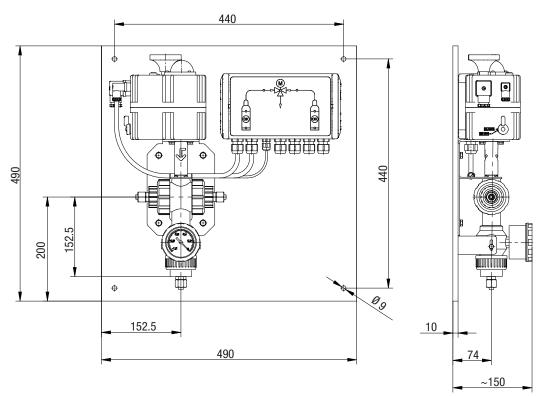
Dimensioned drawing C 7523 on mounting plate
